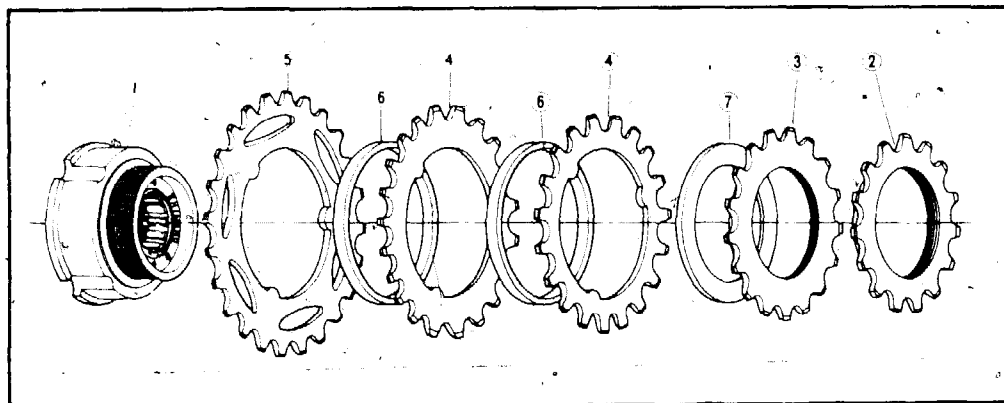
Shimano Model FC-300 multiple freewheel. Parts are: (1) freewheel body. (two through five sprockets), (6) spacer A and (7) spacer B.
